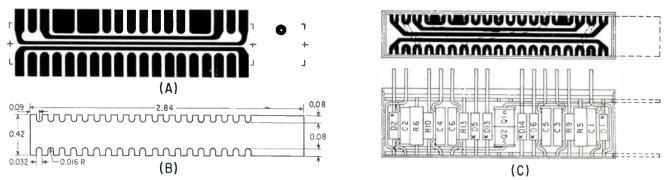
Artwork for a single board side (A), board blank dimensions (B) and a portion of an assembly layout (C)
